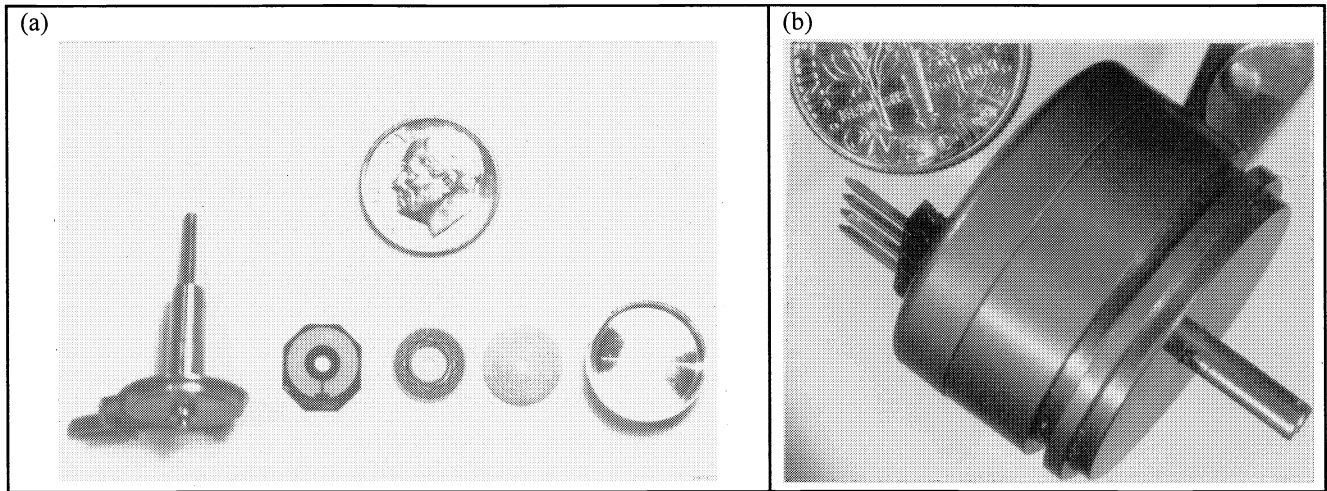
(a) RDT 2 package components, showing, from left to right, the rotor shaft and housing, the base IC chip, the armature (rotor disk), the disk spring, and the housing cover; (b) Industrial RDT package.
